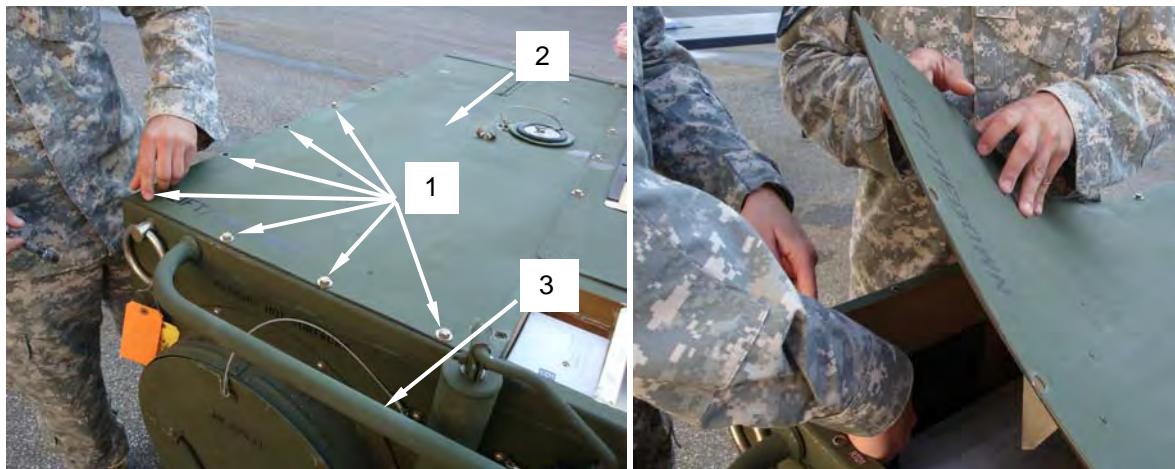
Removing Bolts Along Edge of Heat Exchanger Cover.
